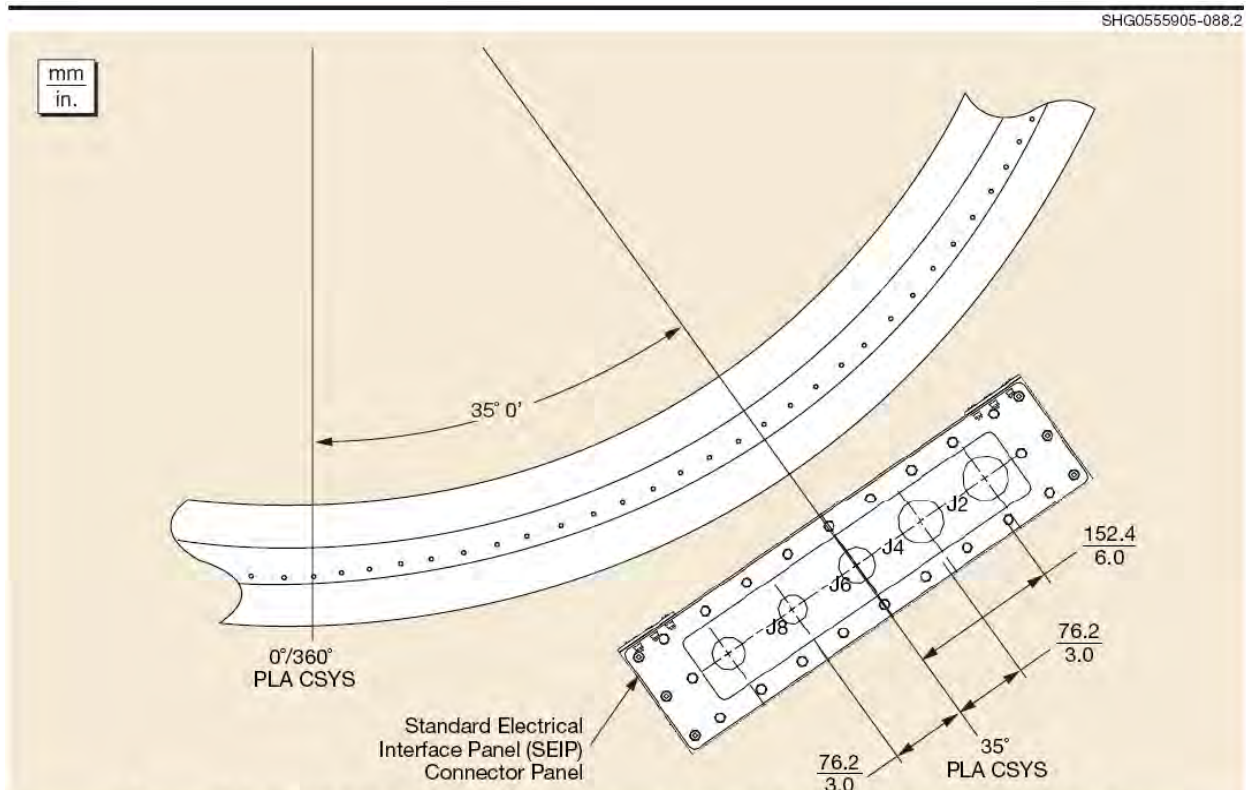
1575-5 PAF Electrical Connector Bracket Detail (35 deg PLA CSYS)
